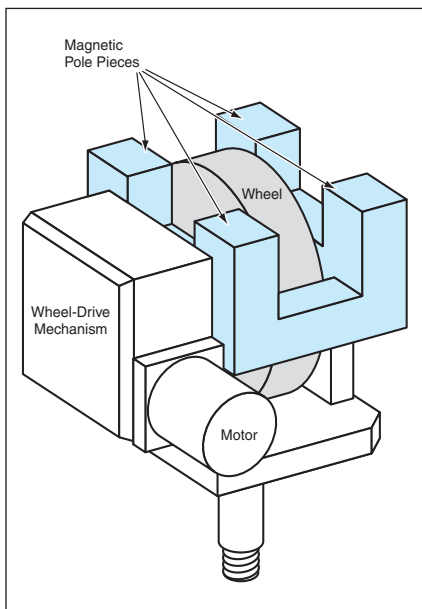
One of the Four Wheel Assemblies of the MAGMER is depicted here with the surface-adhering ends of the magnetic pole pieces facing upward.
